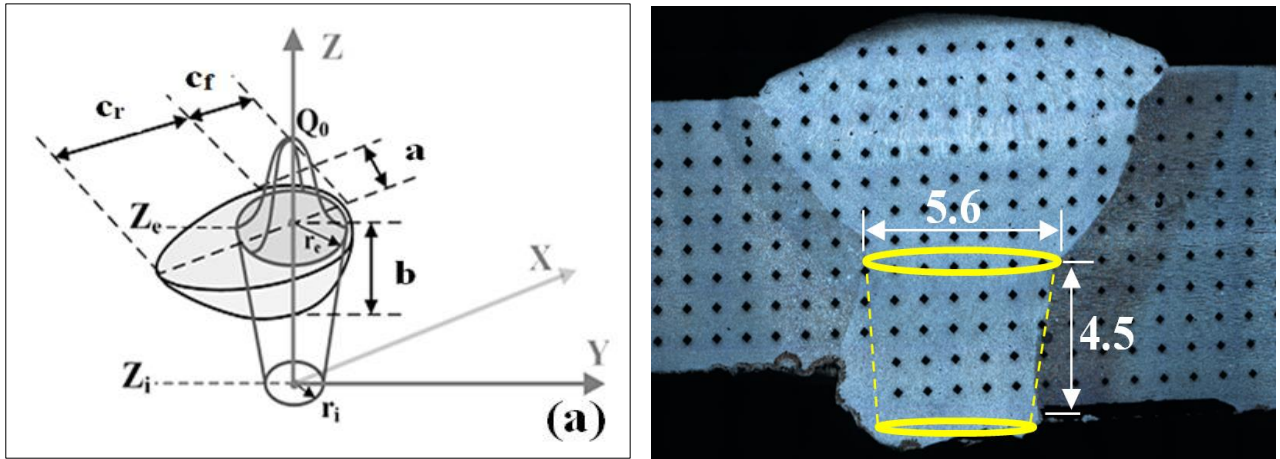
(a) Combined heat source model (b) Schematic illustration of first pass weld (dimensions in mm)
